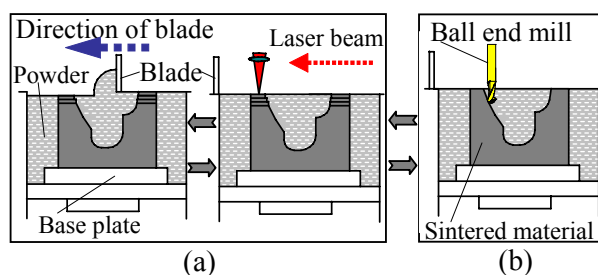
Concept of milling-combined laser sintering system (MLSS) (a) forming layers and (b) high speed milling
